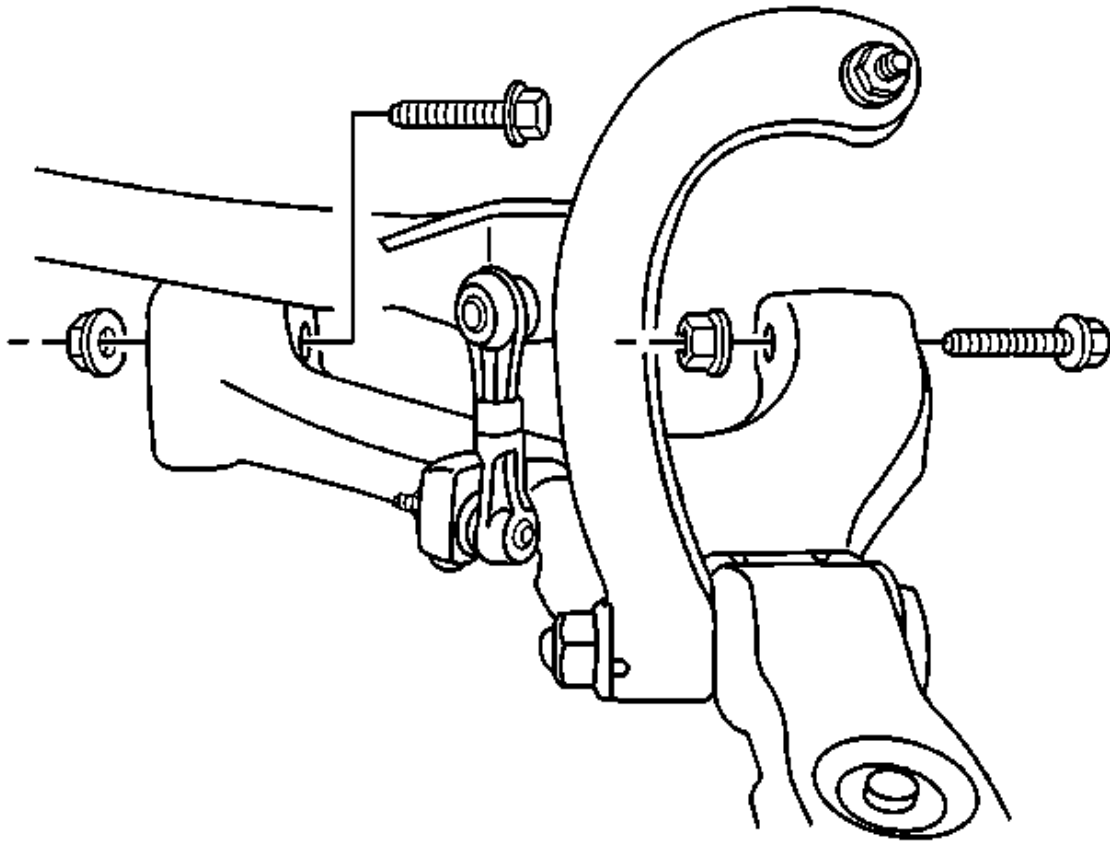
Removing/Installing Lower Control Arm-To-Lower Control Arm Bracket Mounting Nuts
